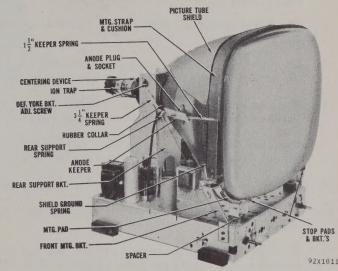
B. 20 or 21" Glass Pix Tube Mounting
